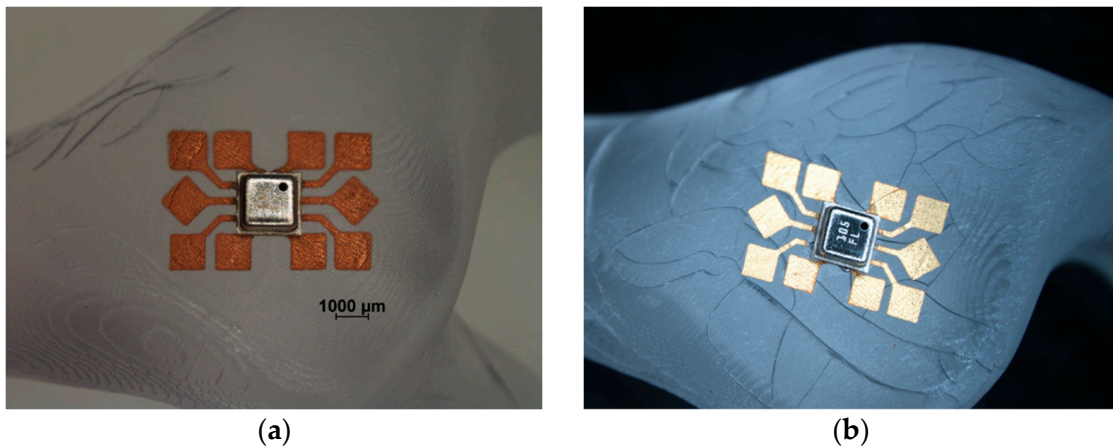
Soldering of pressure sensor BMP388 with SnBi solder at 180 °C (substrate: Luxaprint 3D mold). Aerosol jet printed Ag structures after electroless copper plating (15 min) (a). Aerosol jet printed Ag structures after electroless copper plating (15 min) and electroless plating with Ni/Au surface finish (b).
